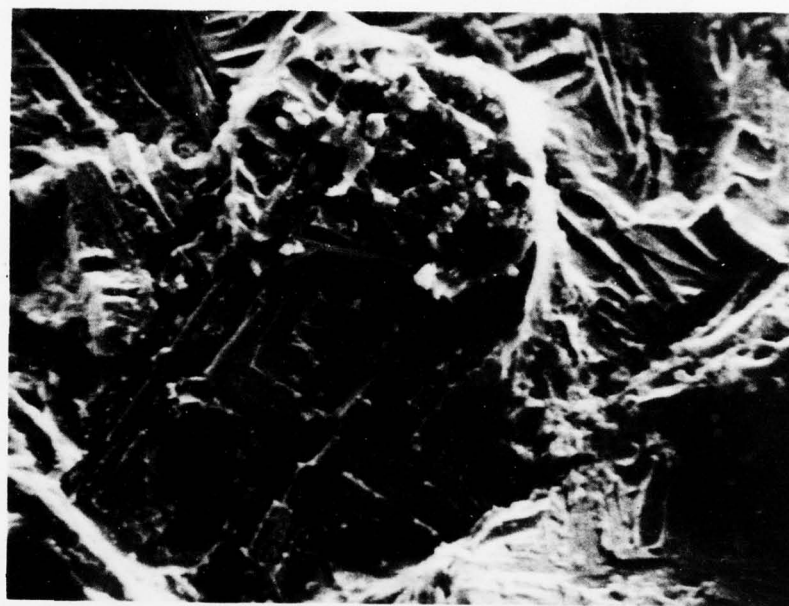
Sustained Load Crack Growth Fracture Surface of Specimen B-1-16
